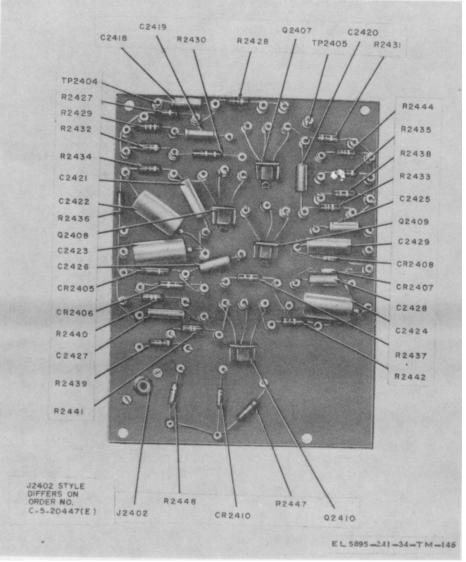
Amplifier Assembly AM-2817/FSW-8, terminal board TB2402, parts location.
